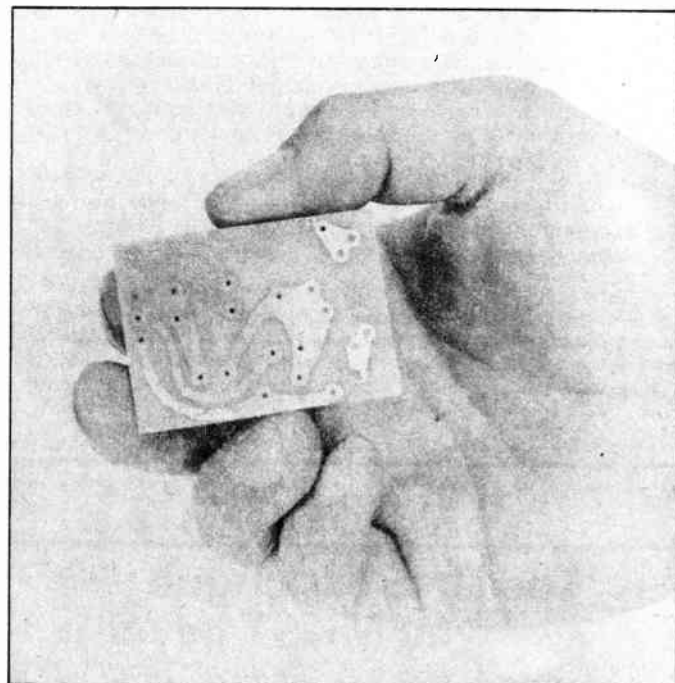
Underneath a printed circuit board (PCB). Each track is used to connect between two or more components
